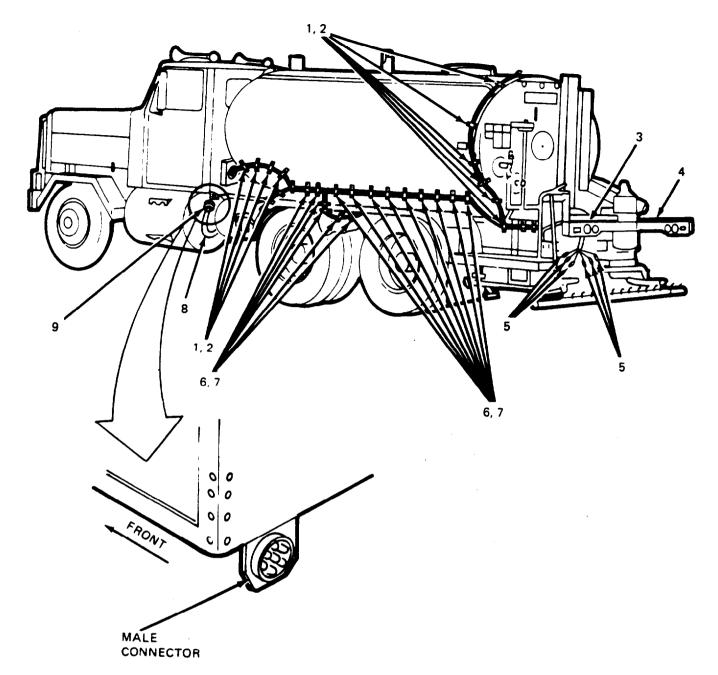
Bumper Terminal Board Wiring Connectors.
